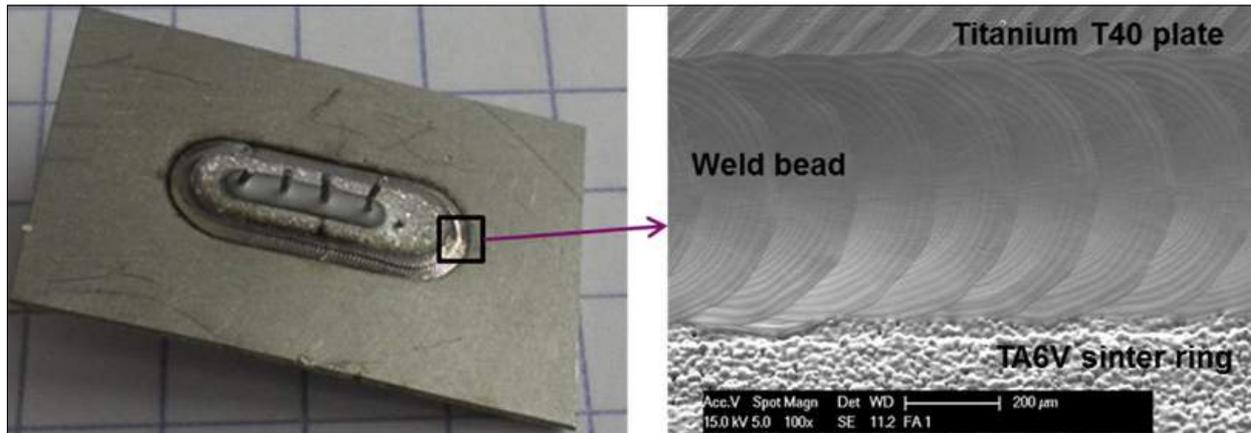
MPFR with a racetrack shape weld on Ti-6Al-4V T40 plate [3]
